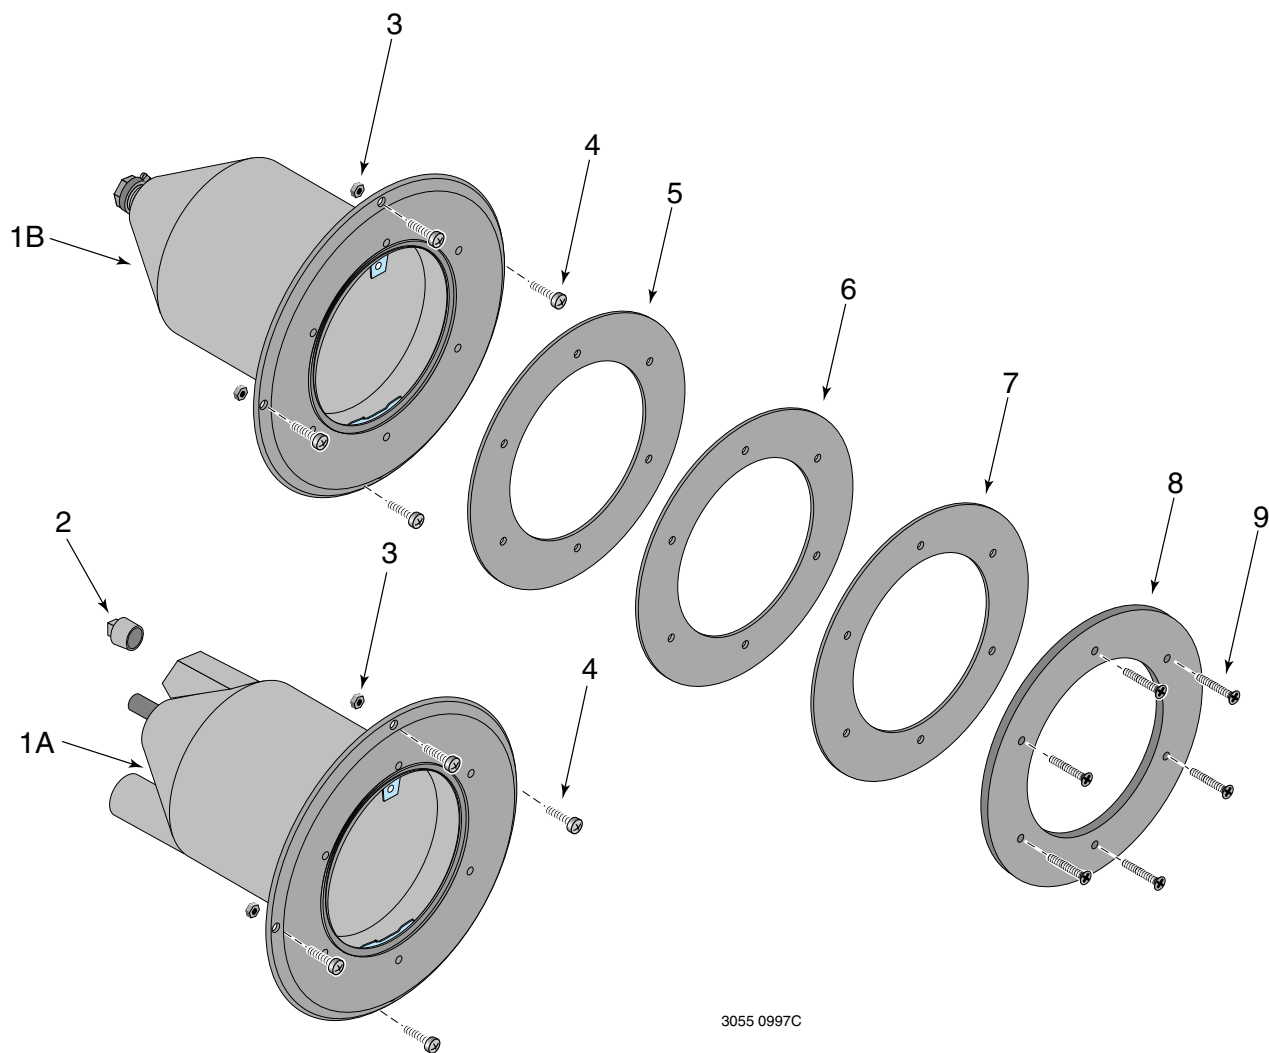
Small Stainless Steel Light Niche Exploded View
